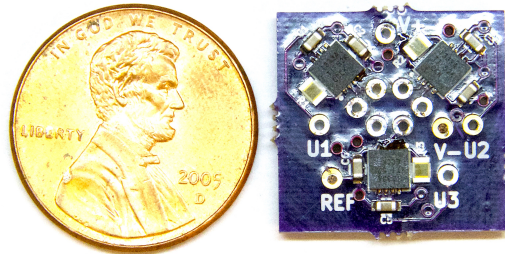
Three Channel INA333 Printed Circuit Board (PCB)
